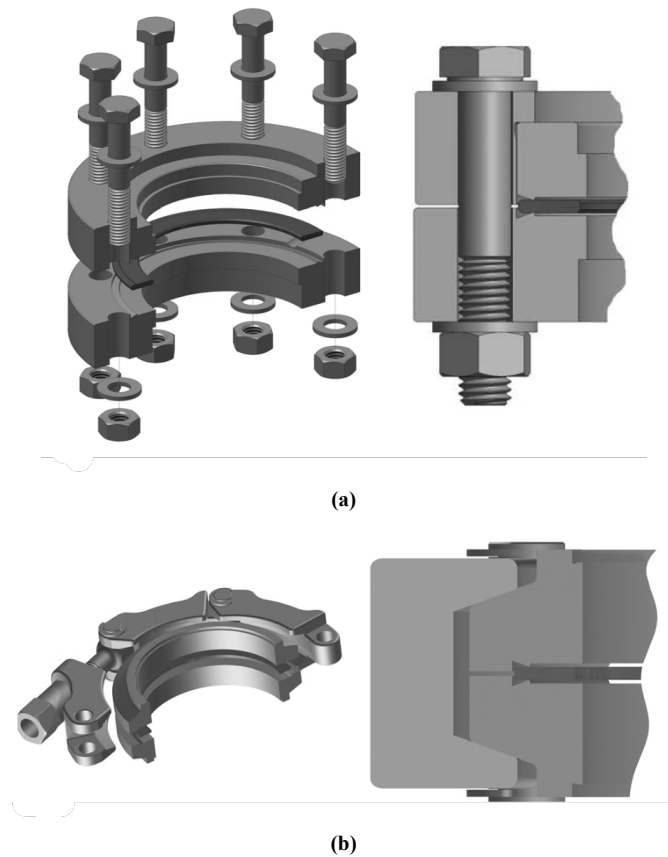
Schematic drawing of Klein flange quick release coupling (KF) and clamp flange joints (ISO-F): (a) Klein flange (KF) quick release system, (b) Clamp flange (ISO-F) system, from [16].
